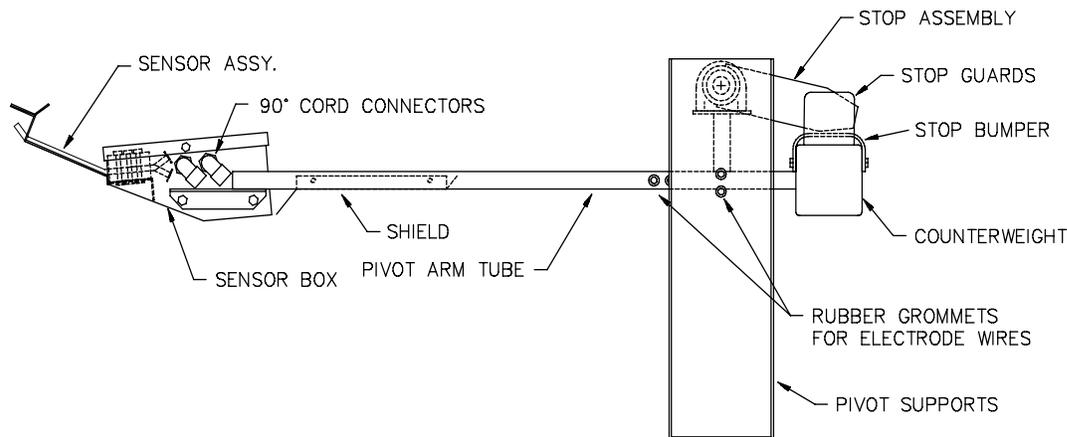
18930 FLOATING SENSOR ASSEMBLY
